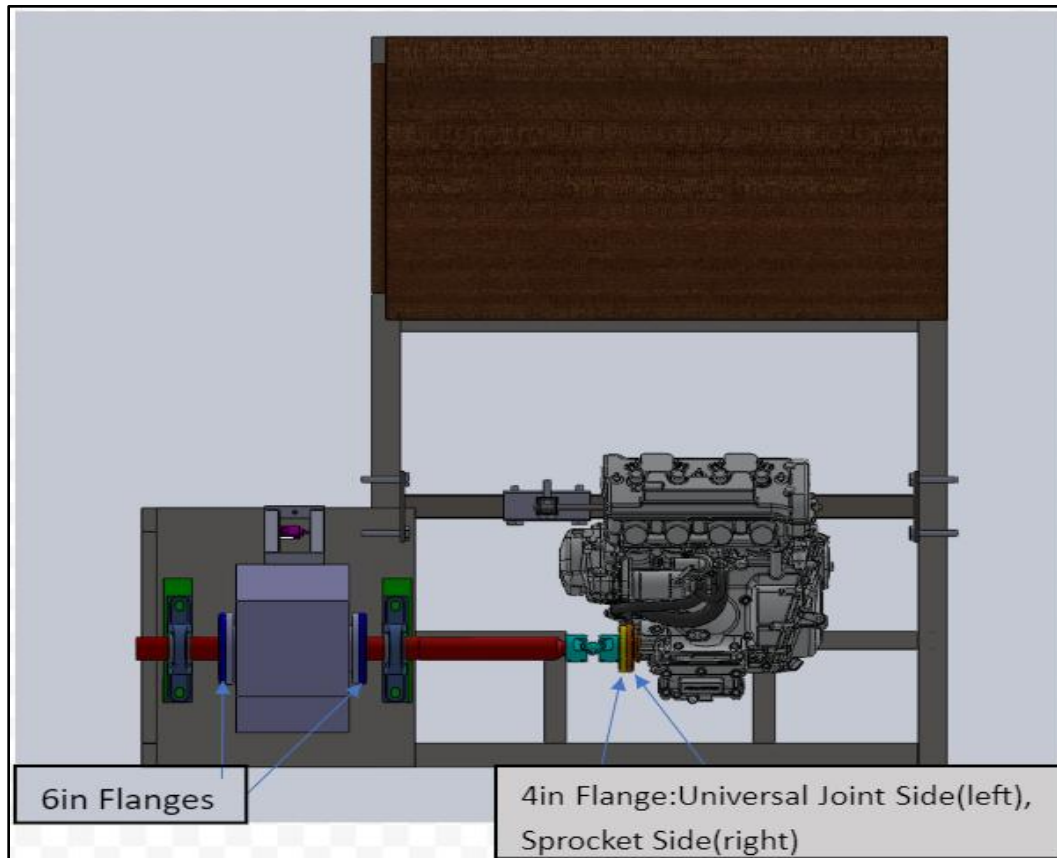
Engine Dynamometer SolidWorks drawing highlighting the Flanges
